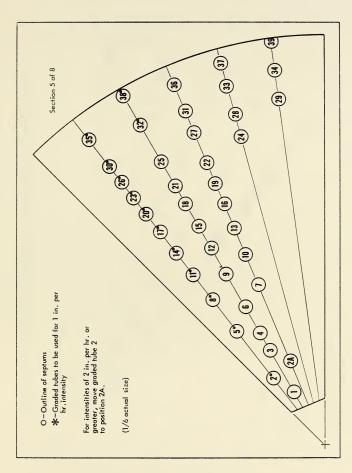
Graded tube arrangement for applicator unit: Section 5.
